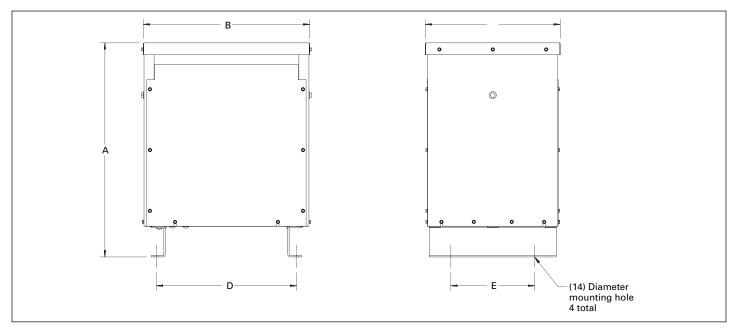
Three-phase enclosure FR939 – dimensions in inches (mm)
